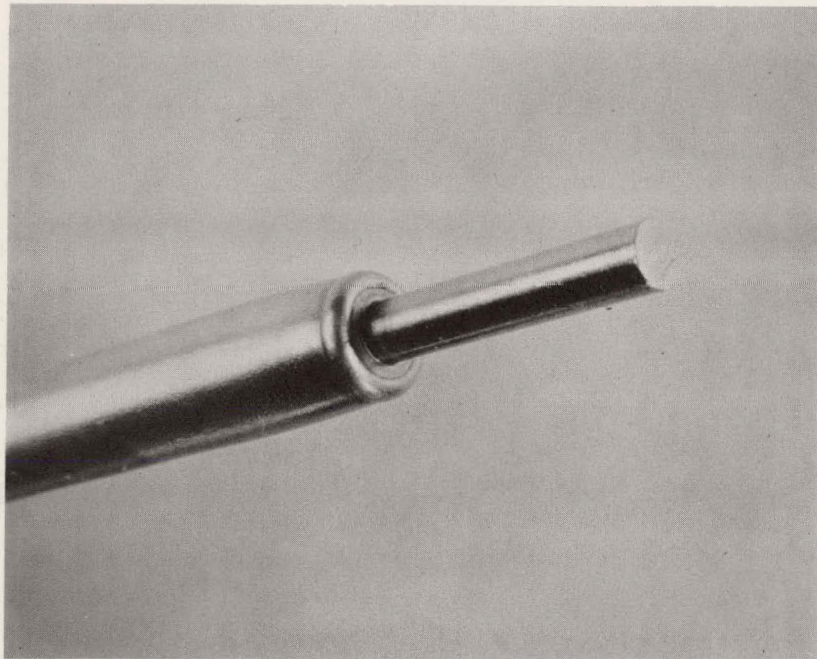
Reduced Shoulder End Cap Weld
